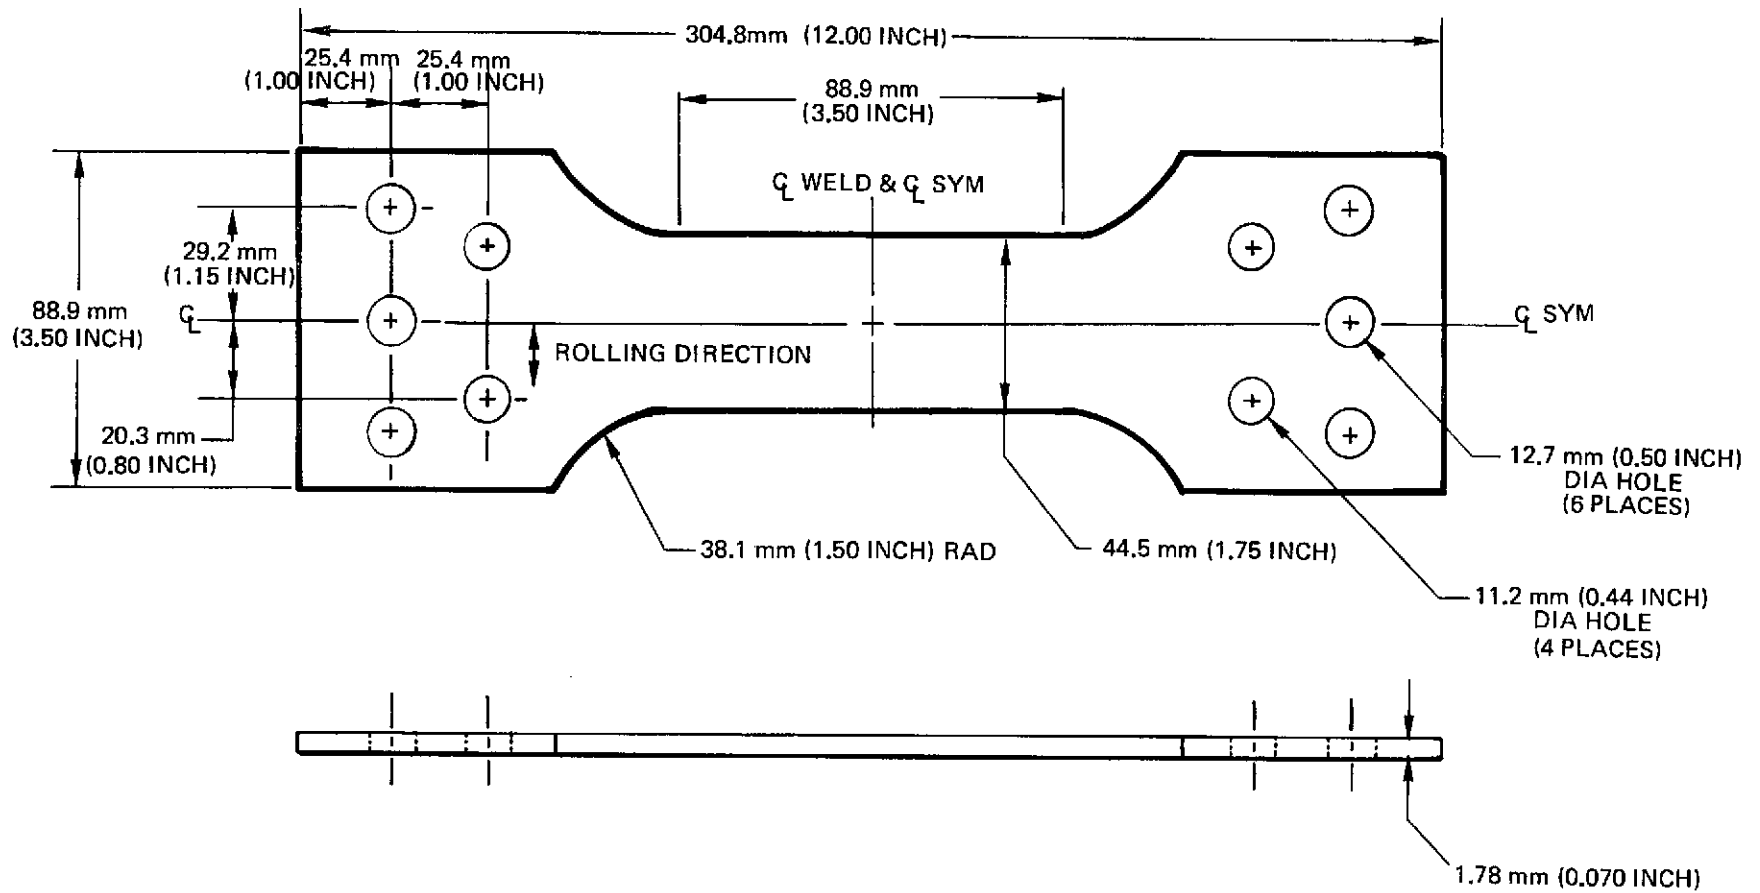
1.78 mm (0.070 INCH) X 44.5 mm (1.75 INCH) 6AL-4V TITANIUM ALLOY WELDMENT SPECIMEN
